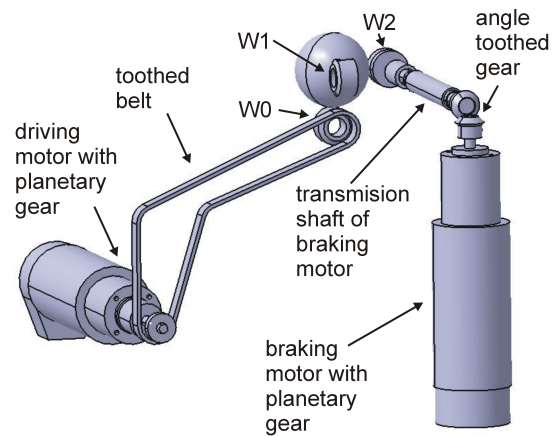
Model of experimental setup – the gear coupled with drive and brake
